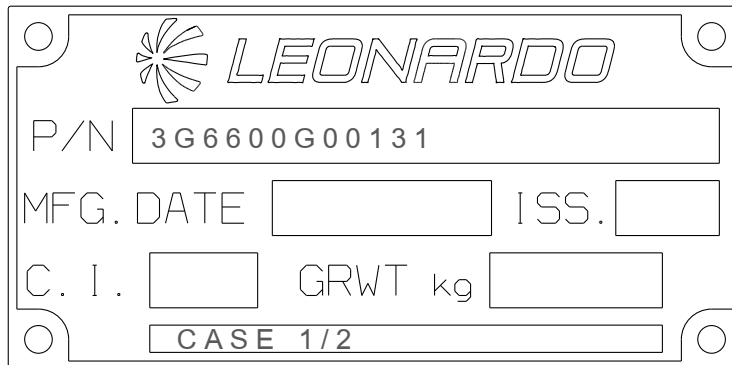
Tool Kit, M/R Blade Folding, Case 2 (Sheet 2 of 2)
